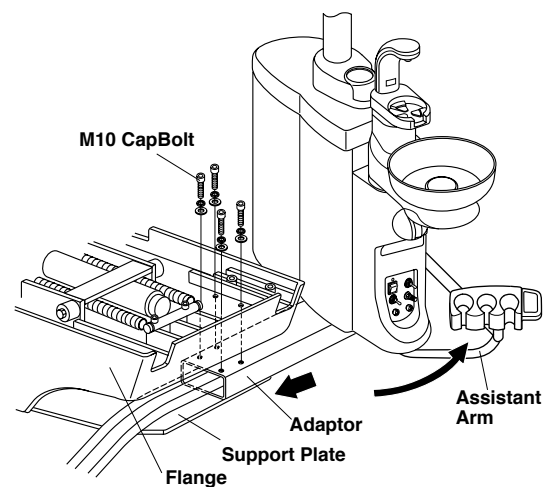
Mounting the Cuspidor Unit onto the Chair
